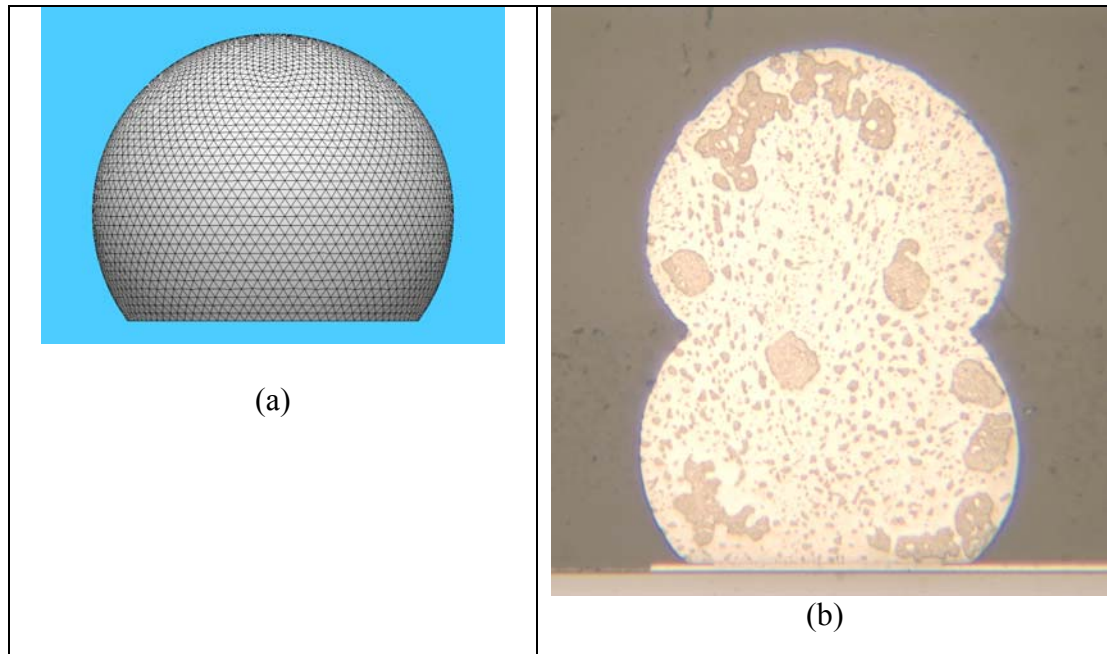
(a) The appearance of the solder bump shape predicted using Surface Evolver, (b) the experimentally obtained cross-sectional image of a flip chip die with double bump structure
